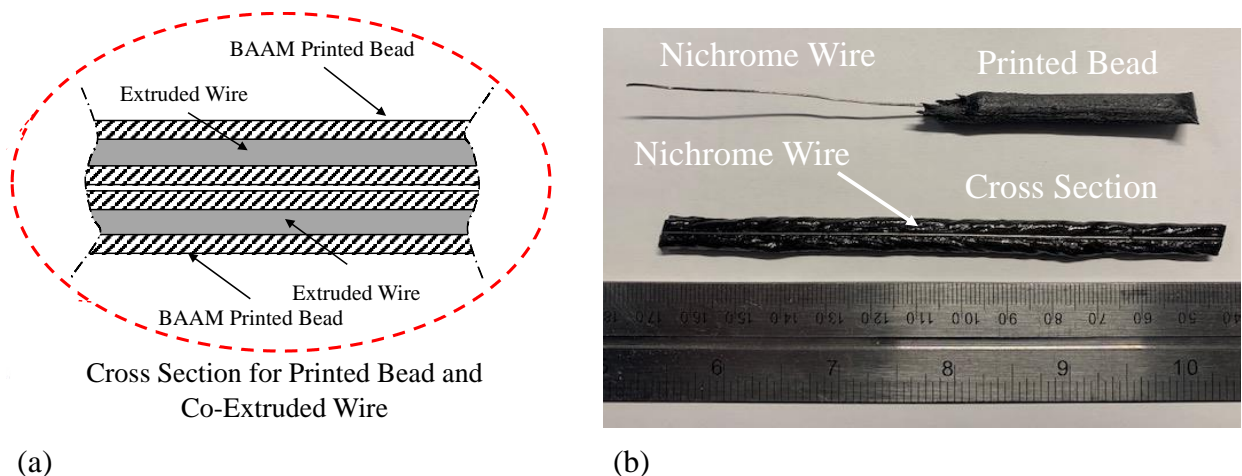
(a) Schematic showing the wire co-extrusion concept, and (b) Example for a printed BAAM bead with embedded co-extruded resistive heating wires
